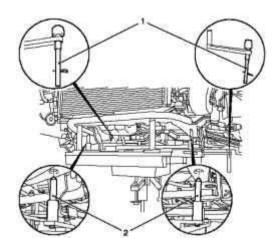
Fixing the front axle on jack: 1, 2 - pins
